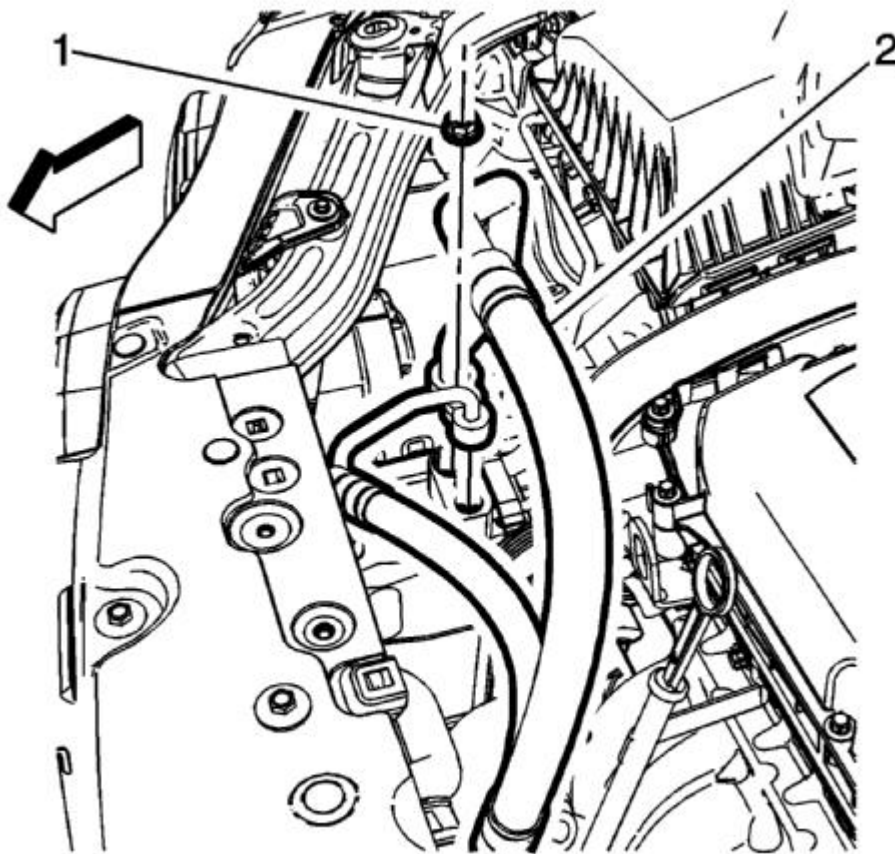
Air Conditioning Compressor, Condenser Hose & Nut
